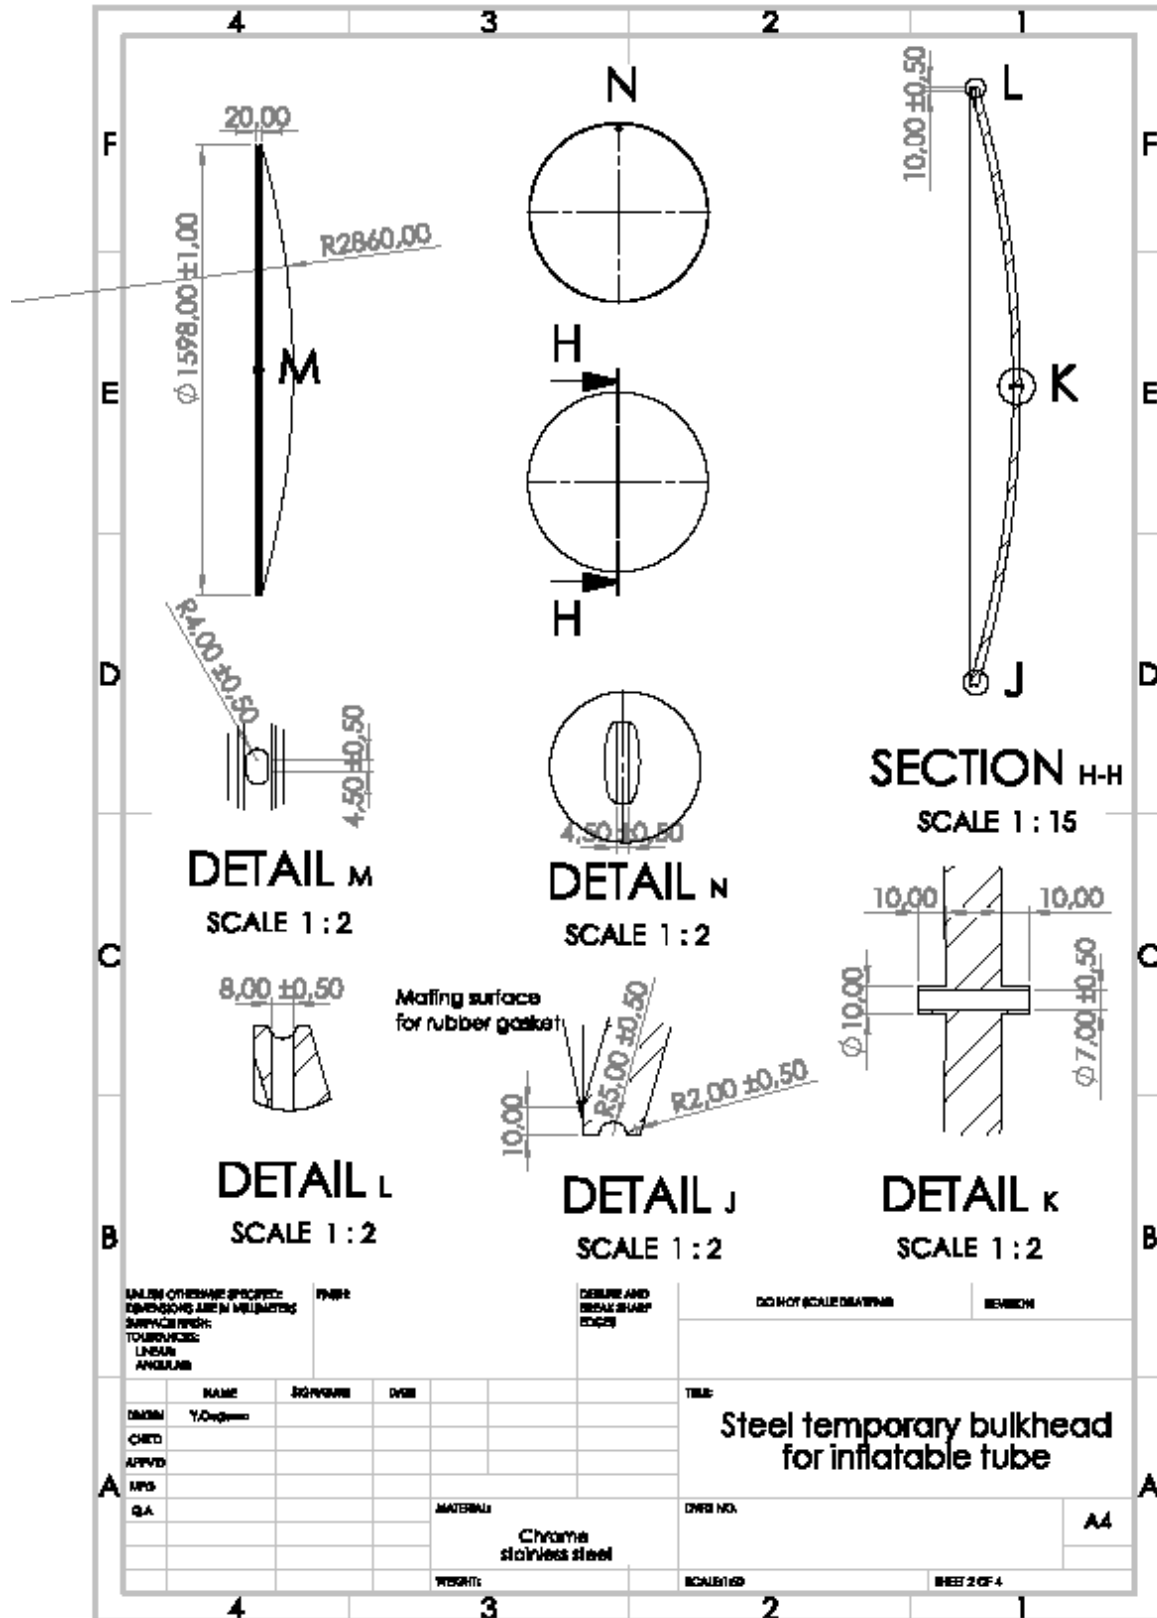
2D technical drawing for the water passage inflatable tube steel temporary bulkhead
